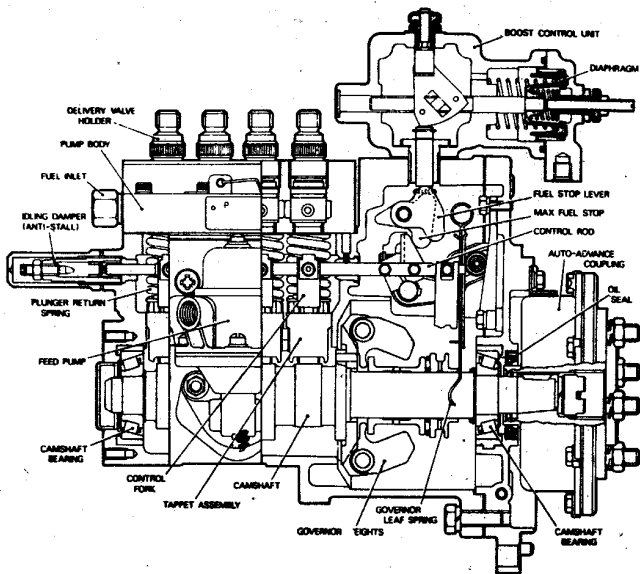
Sectional view of the CAV Minimec fuel point.
